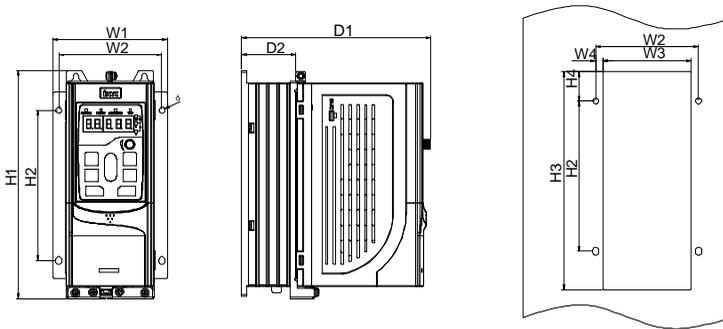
Flange mounting for 380V 1.5–7.5kW VFD models
